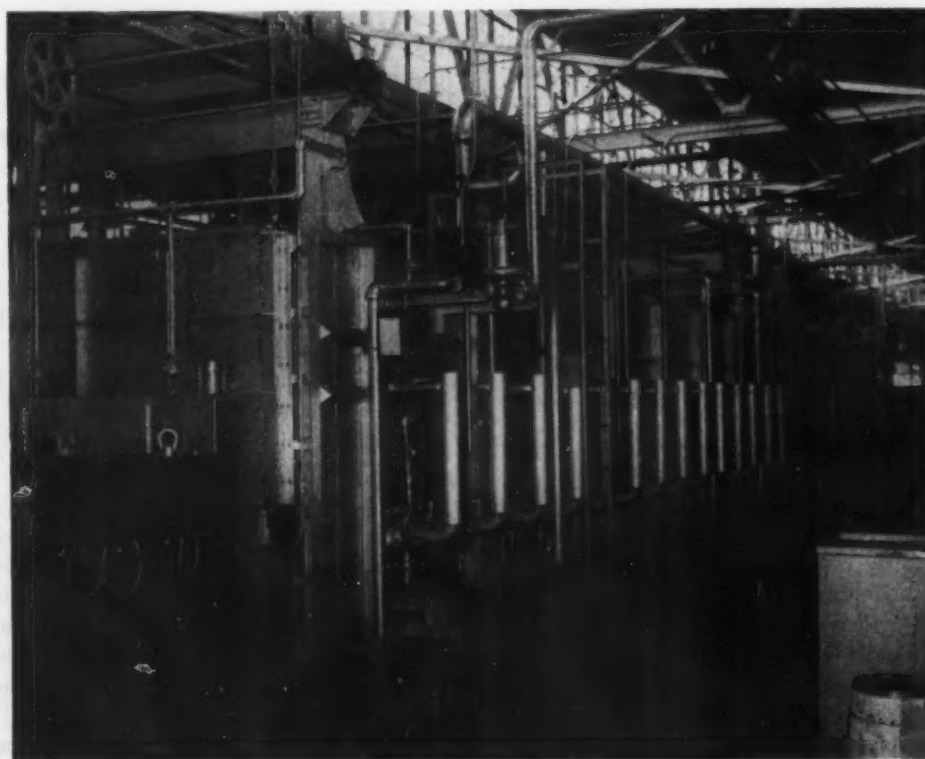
Side view of the furnace showing radiant tube burners and gas safety shut-off valve.
